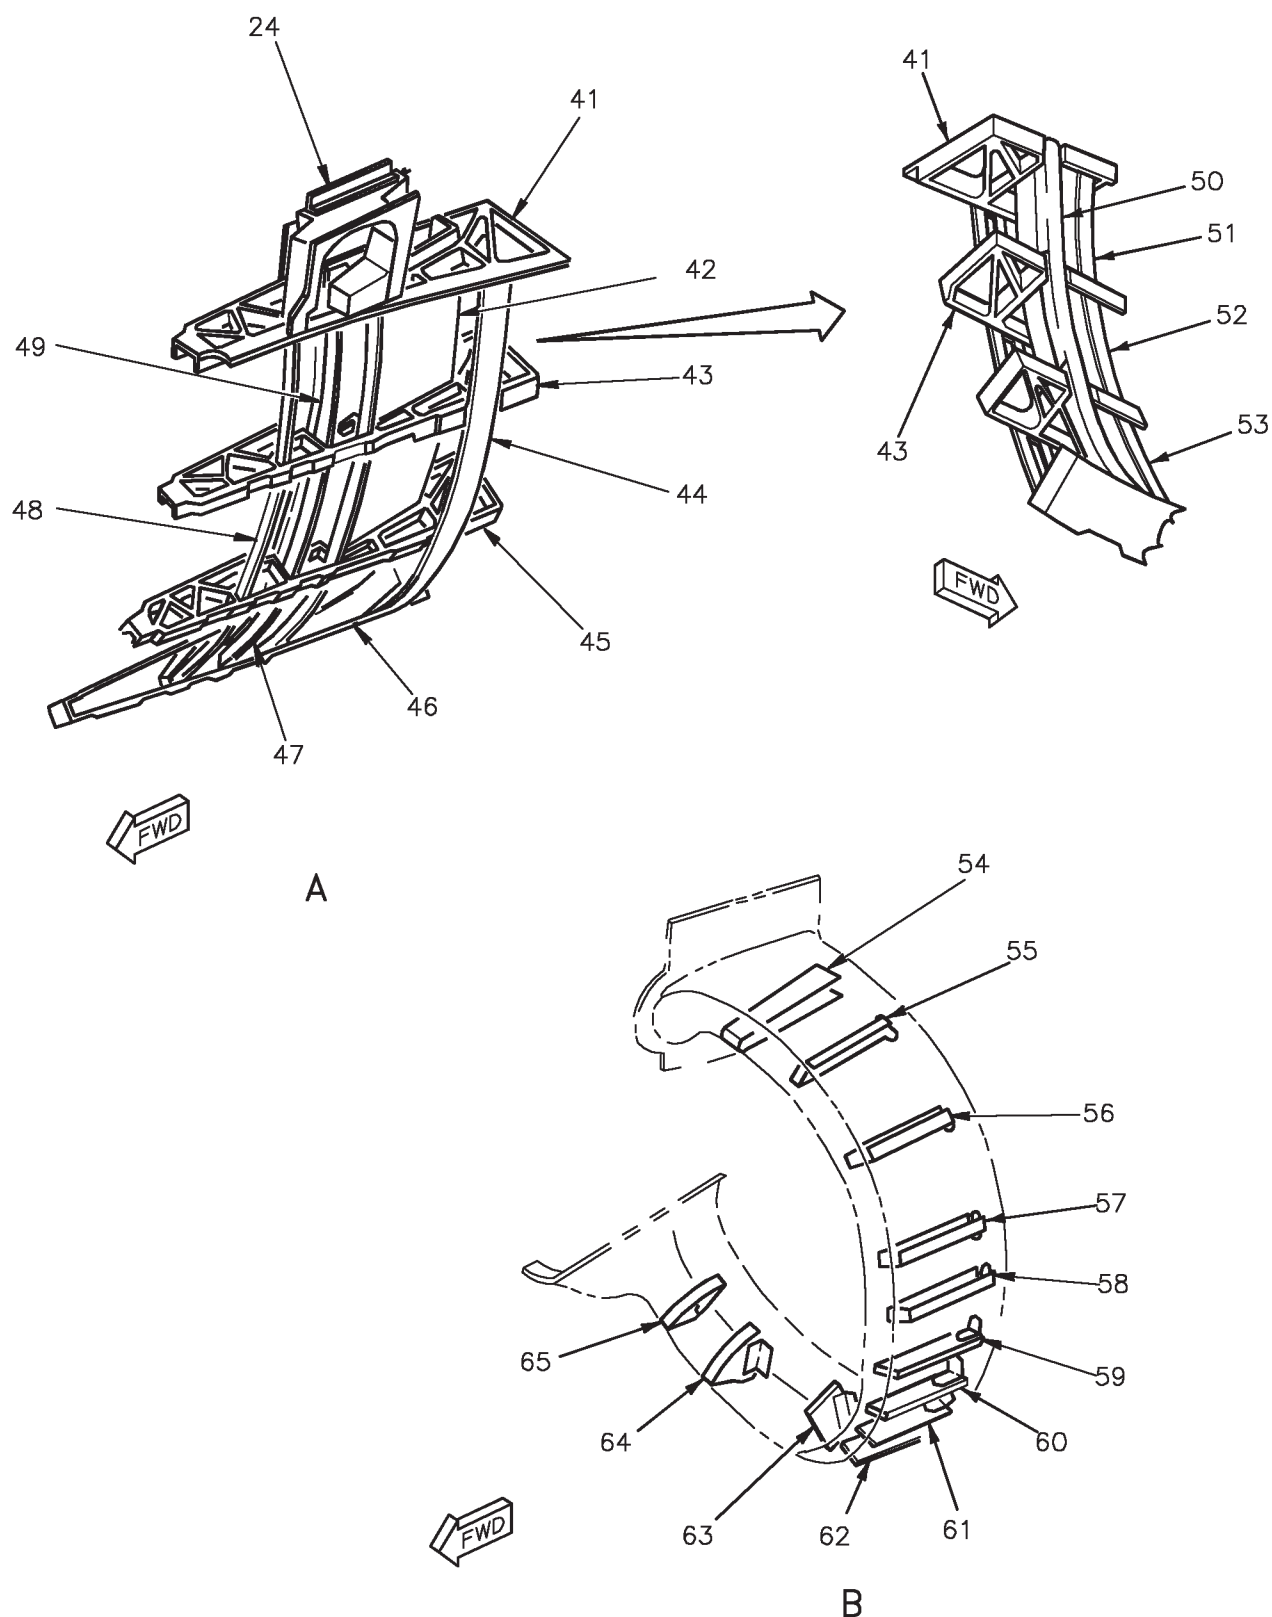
Air Inlet Bulkheads, Formers, Longerons and Stringers (Sheet 3)
